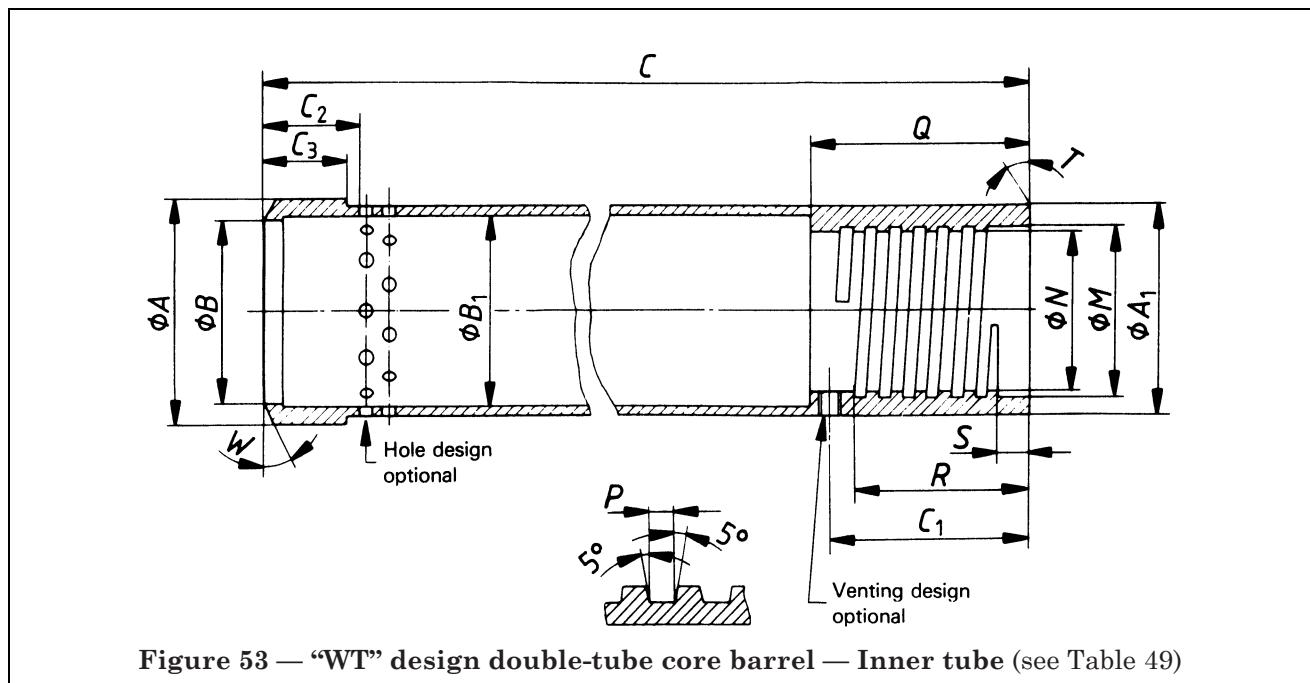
“WT” design double-tube core barrel — Inner tube (see Table 49)
